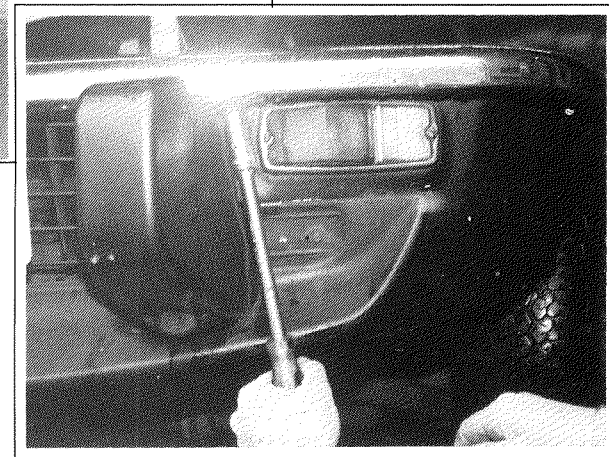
Front bumper nuts come a close second to wiper spindle nuts so pre-soaking with releasing oil is a must. Front nuts first, found either side of the hinge boxes. Once undone, unscrew the bottom Philips screw from the hinge box and then slide off the box.
